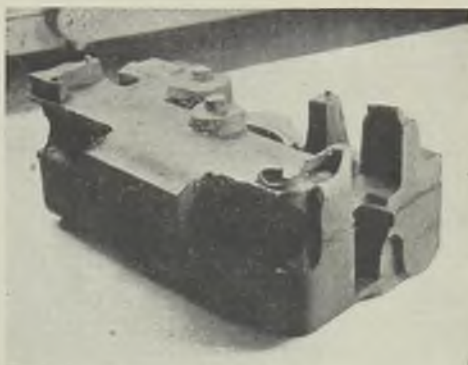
GAS HOLE OR POCKET CAUSED BY DISSOLVED GAS COMING OUT OF SOLUTION IN THE MOULD.
